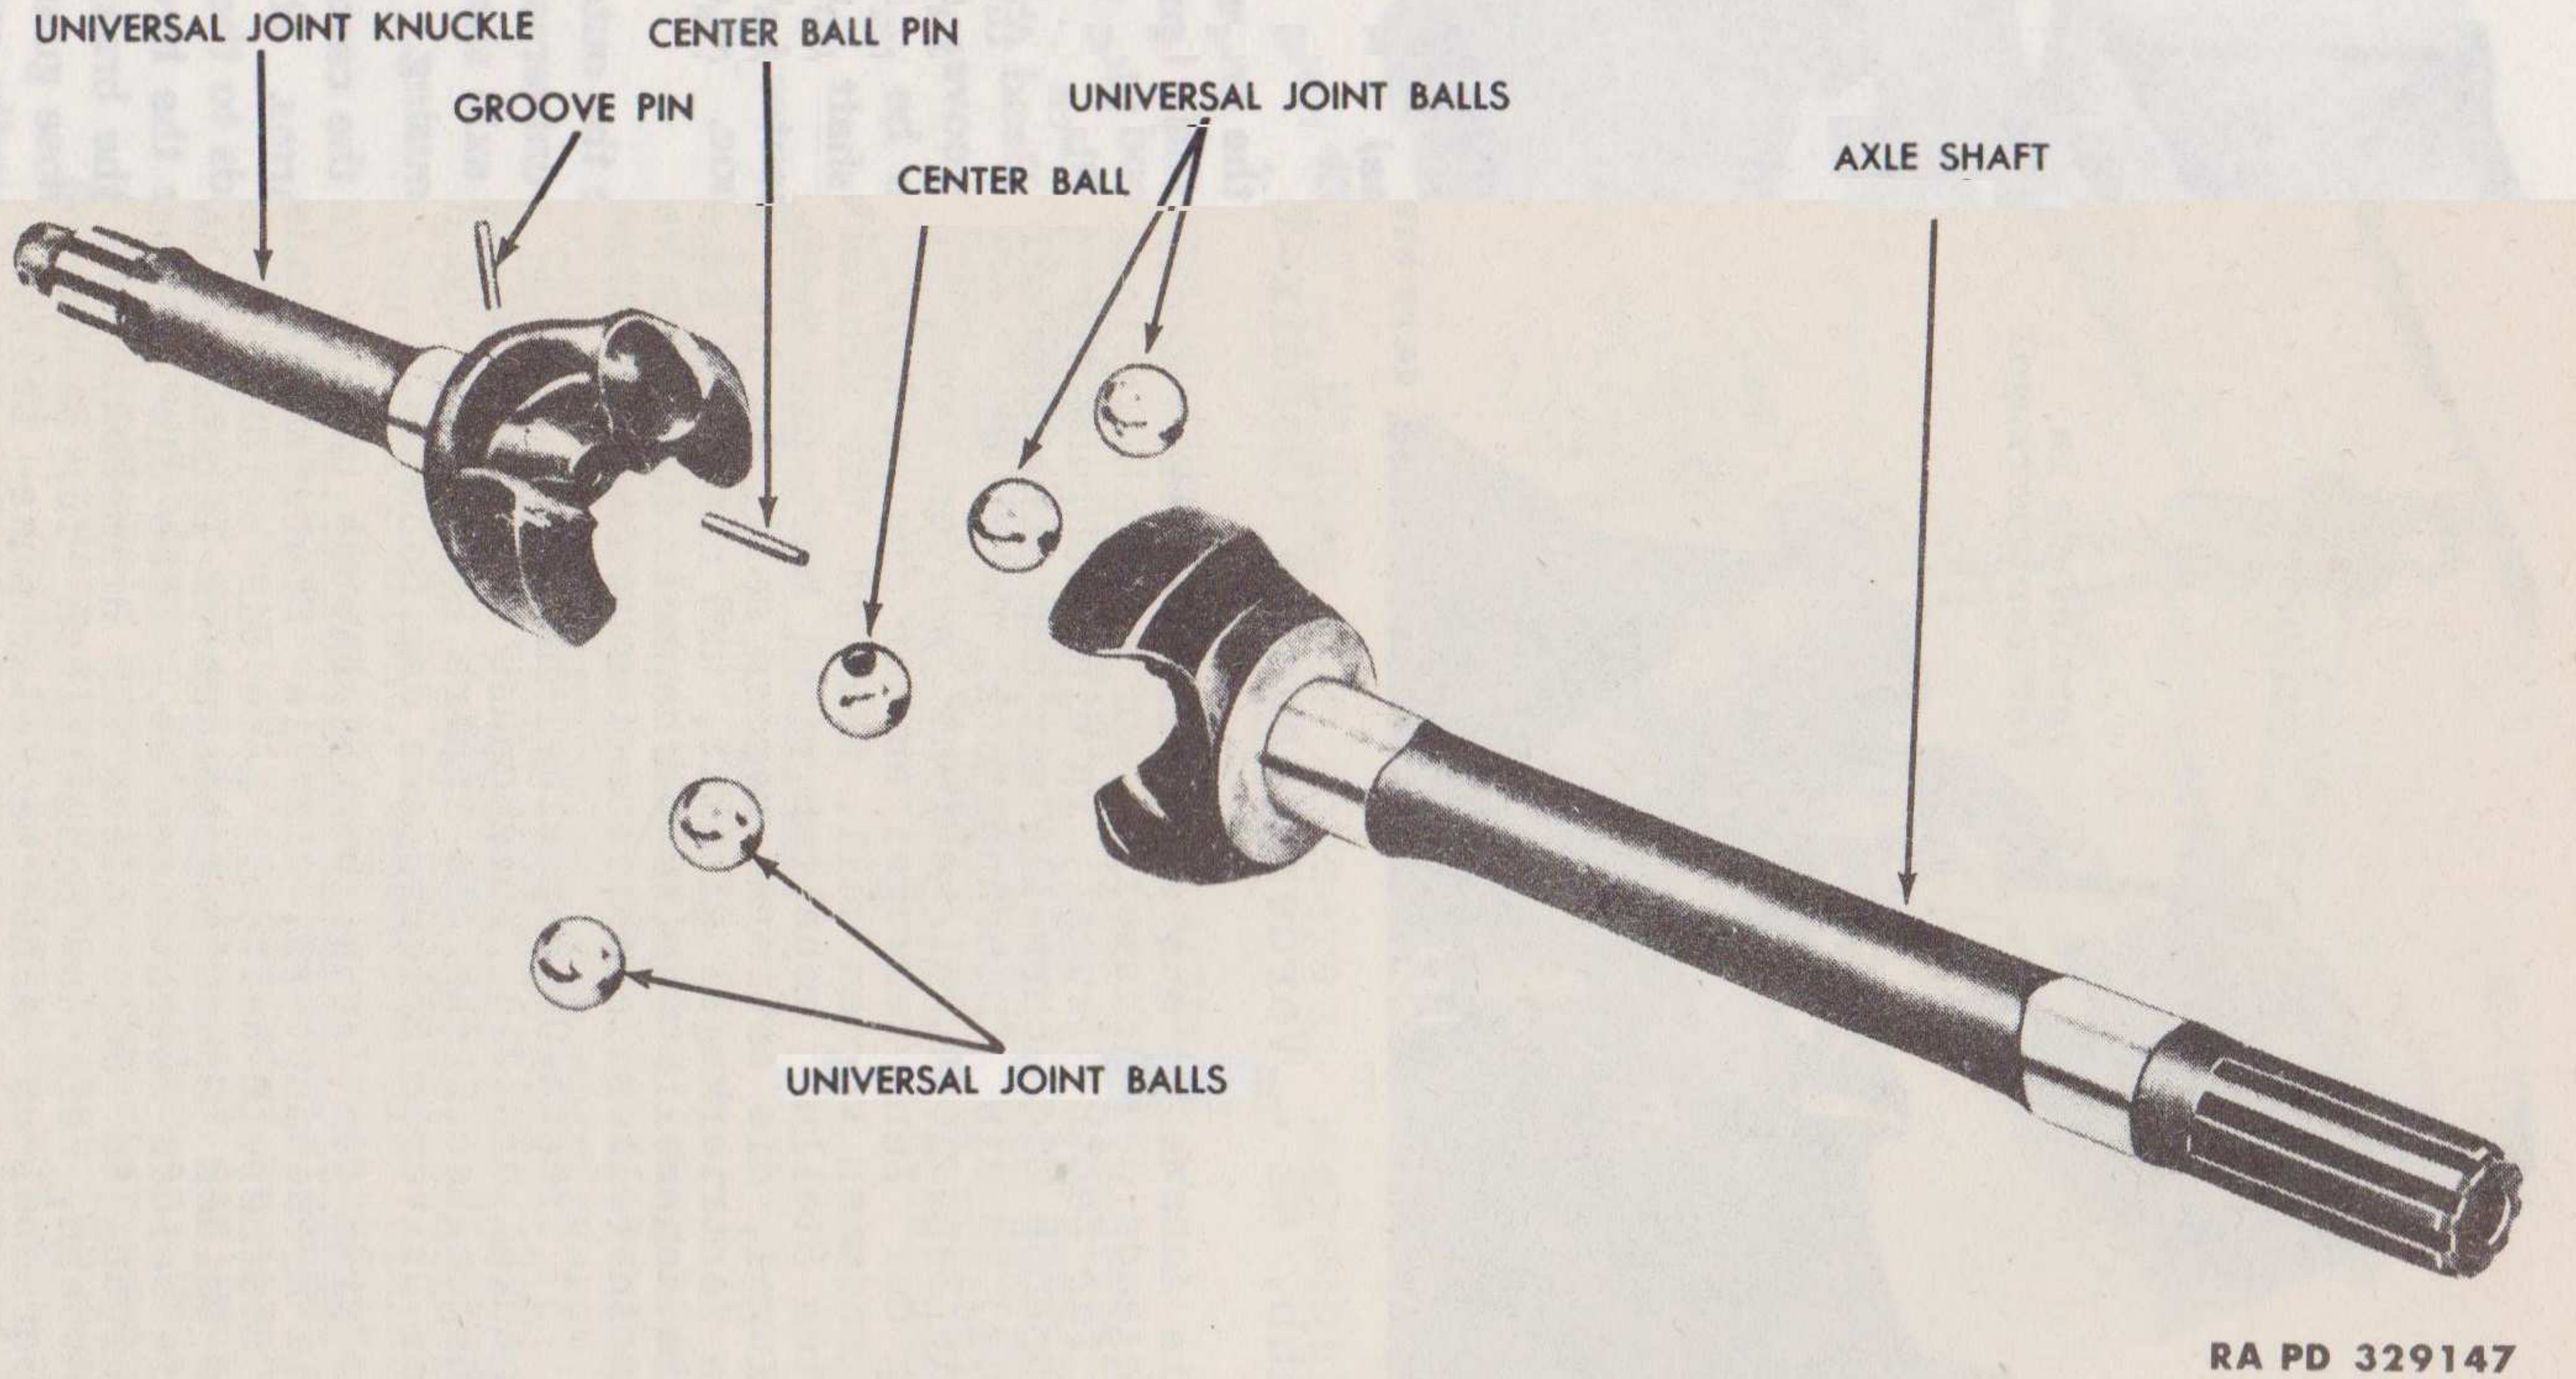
Front Axle Shaft — Exploded View (Bendix Type)
